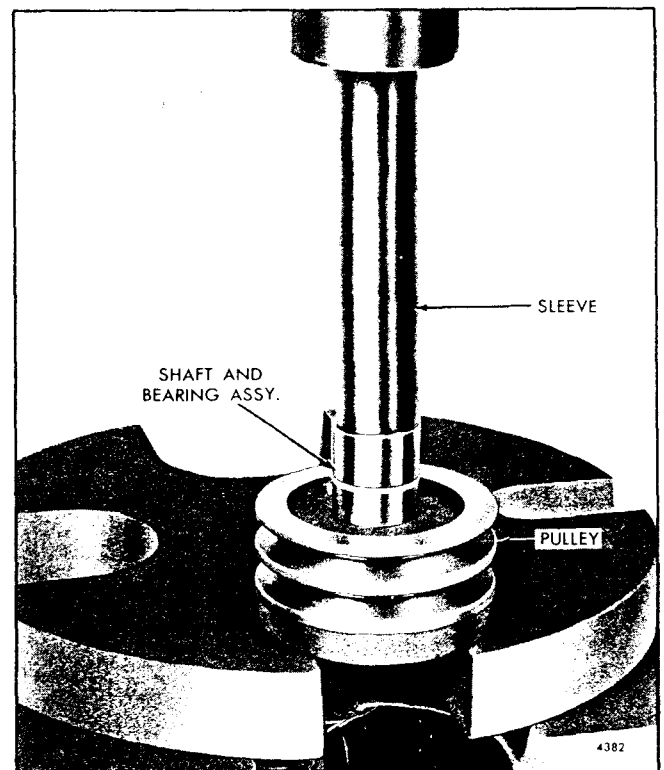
Installing Shaft and Bearing Assembly in Idler Pulley
